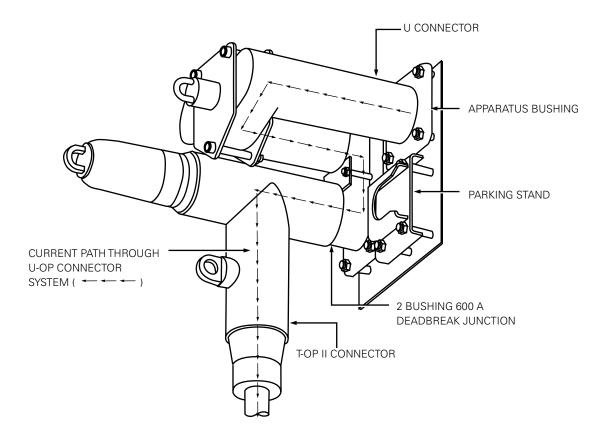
The U-OP connector system in a typical pad-mounted switchgear application.
